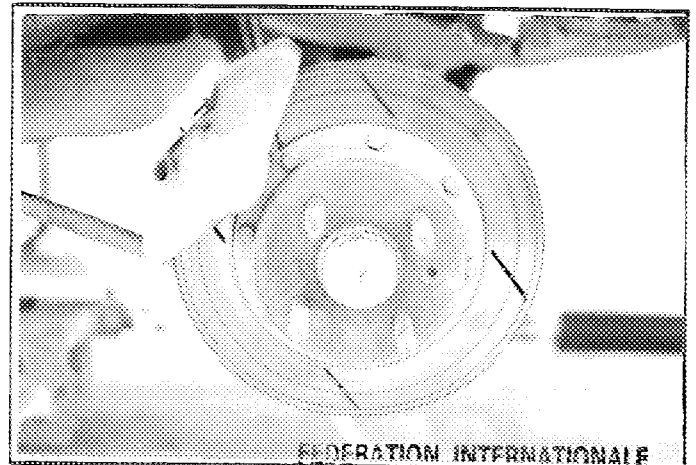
/17 Rear Calliper & disc Arrière / Rear
